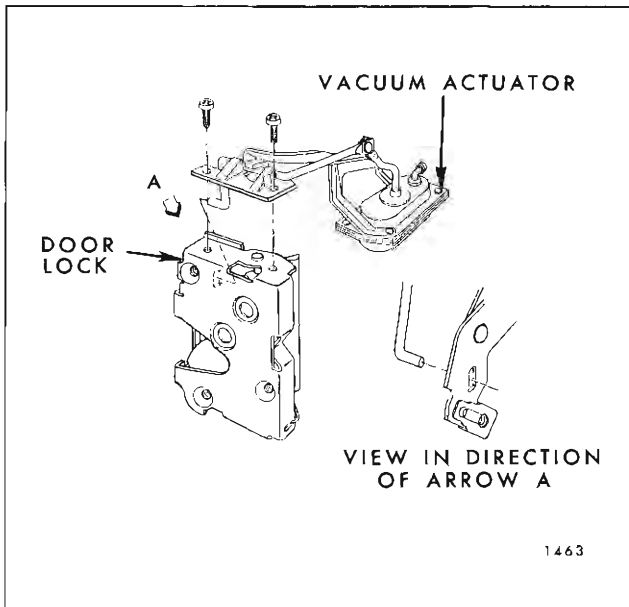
D80—Rear Door Vacuum Lock Actuator Attachment
